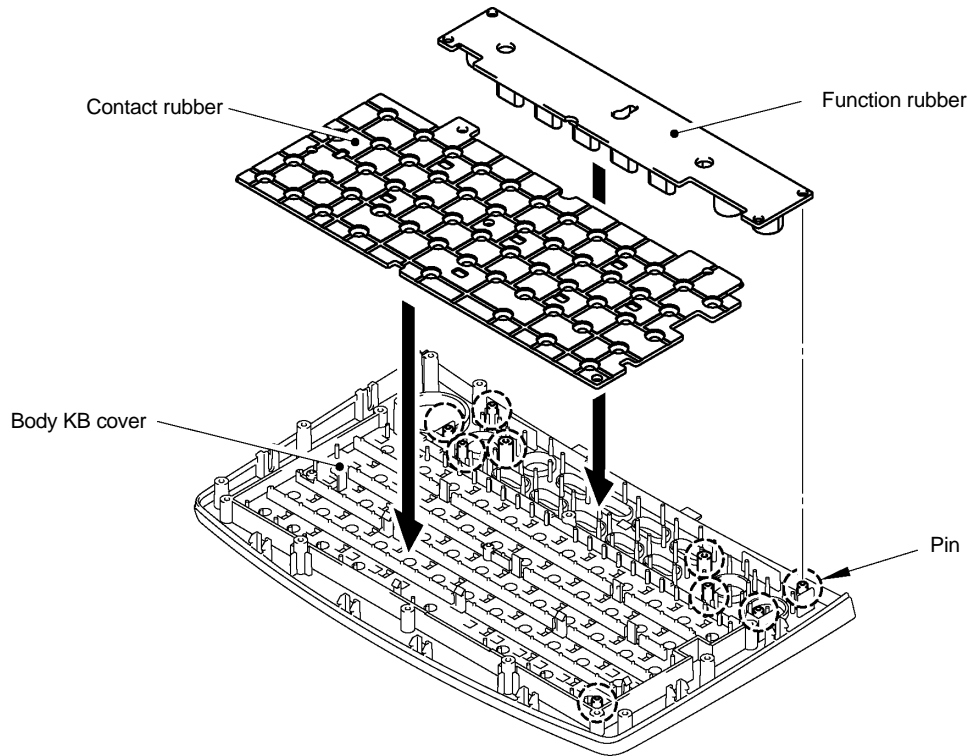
Reassembling the KB Unit/Rubber Key Unit (1)
